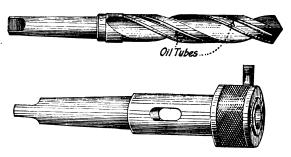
Oil tube drill and oil feeding socket. (Cleveland Twist Drill Co.)
